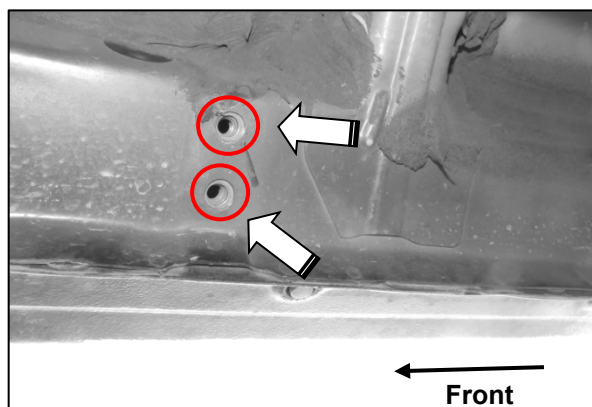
Attached Passenger/Right Front Mounting Bracket at Front Mounting Location
